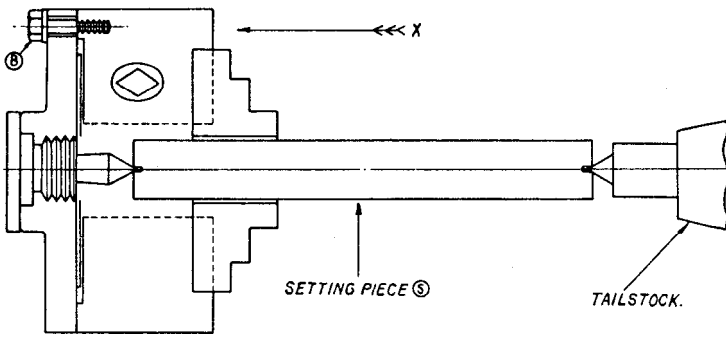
To set chuck for average work without "clock." Mount setting bar S between centres, with bolts B slack, push chuck in direction of arrow X, tighten jaws on to bar S. Body of chuck will move to suit position taken up by jaws. Tighten bolts B
